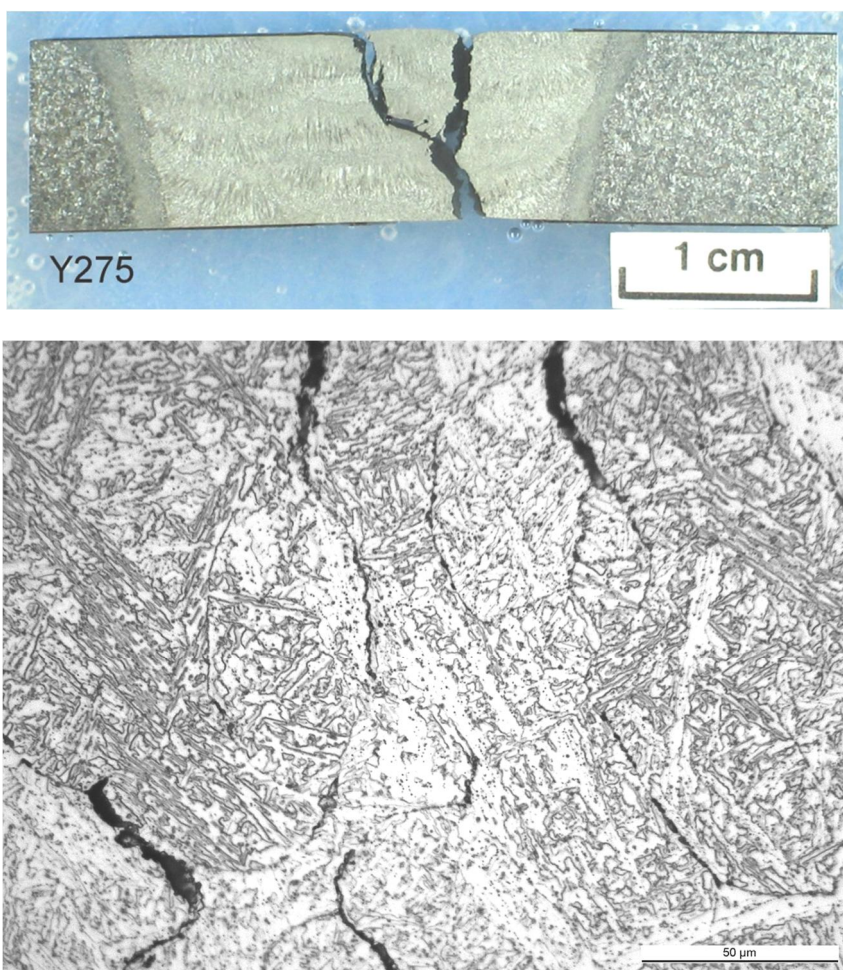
Top: cross-weld creep test of P24 with failure in weld metal; below: creep damage and cracking at grain boundaries in weld metal [9].
